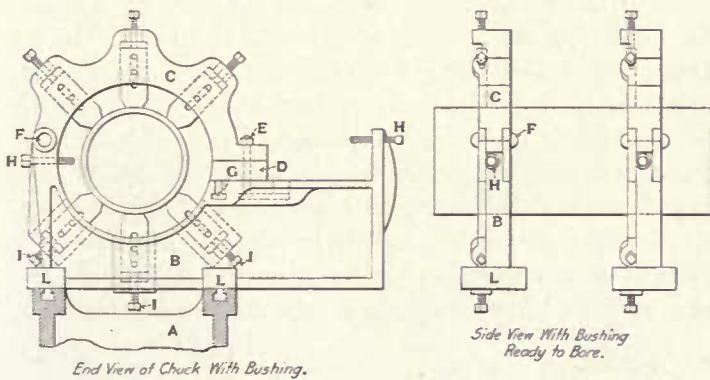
Chuck for Boring Cylinders or Cylinder Bushings.
